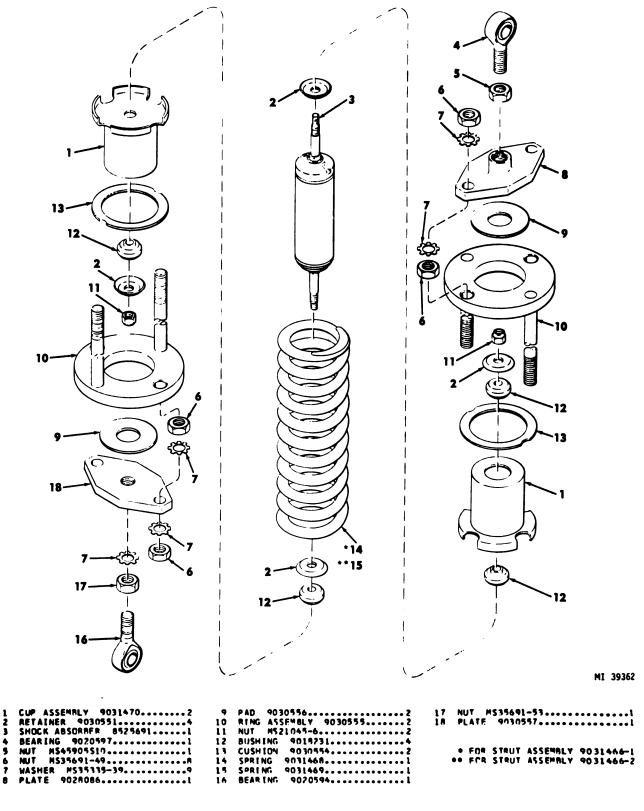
STRUT ASSEMBLY, SUSPENSION /9031466-1 AND 9031466-2/ /SEE FIGURES 126 AND 134 FOR NEXT HIGHER ASSEMBLIES/
